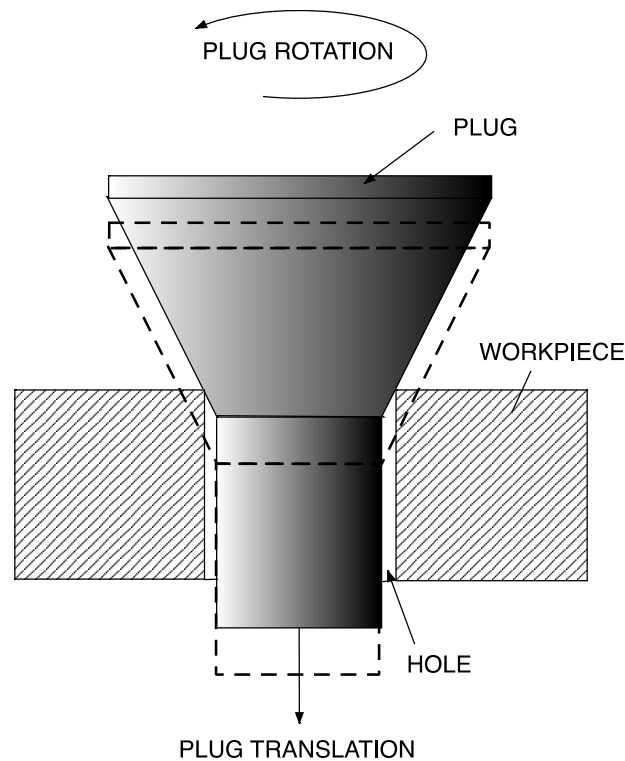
Sketch of plug weld process (a much-simplified plug is shown). Plug is rotated and pulled into hole in workpiece. Workpiece contact metal is extruded out along the contact surface.¹
